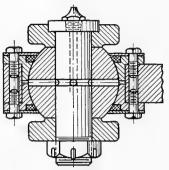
Sheetmetal ball-socket housing with cover fastened by spot welding.
